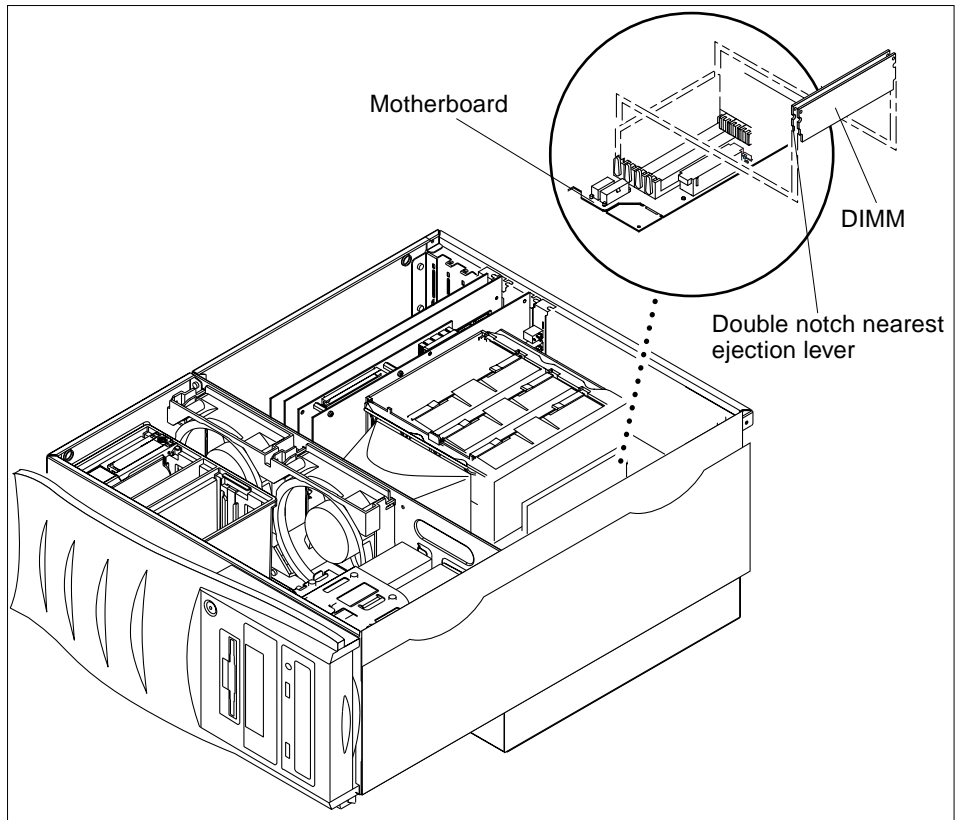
Removing and Replacing a DIMM (Sheet 2 of 2)
